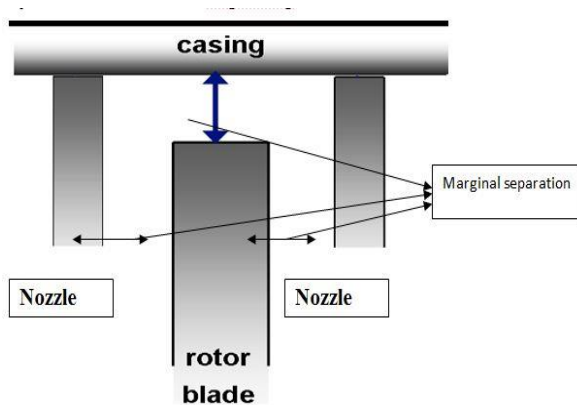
Rotor Casing Assembly of the Gas Compressor
